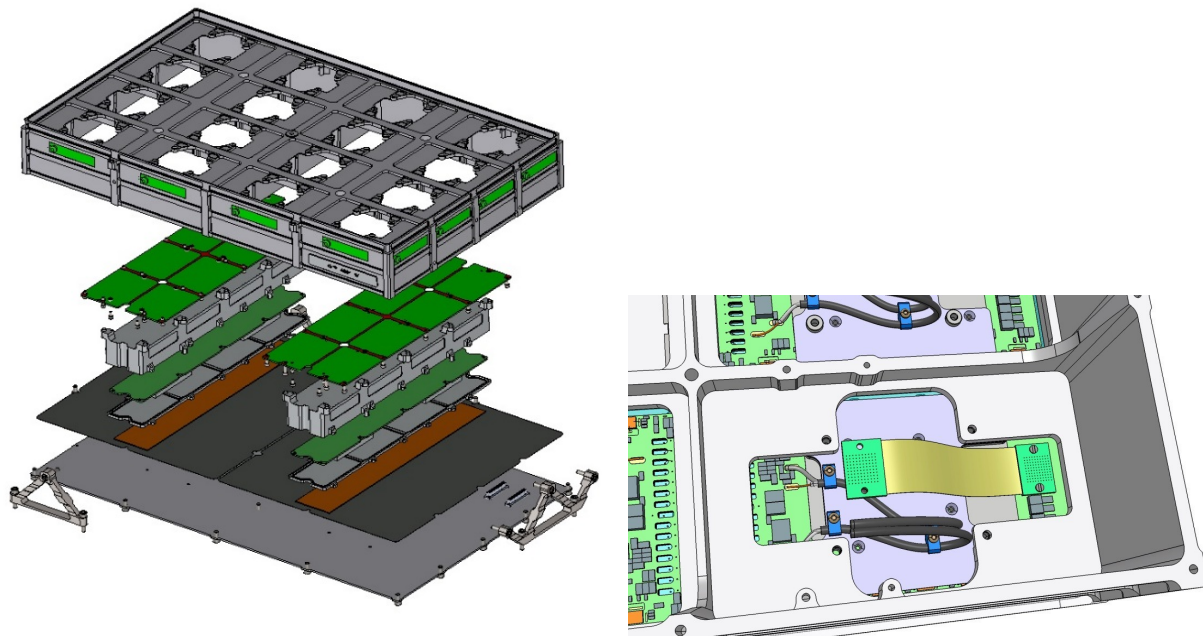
Schematic view of the Module. LEFT: exploded view of the Detector Tray (including Detector Assemblies, MBEEs and PSUs), RIGHT: The Detector Assembly fitting the Detector Frame. From Ref. 5
